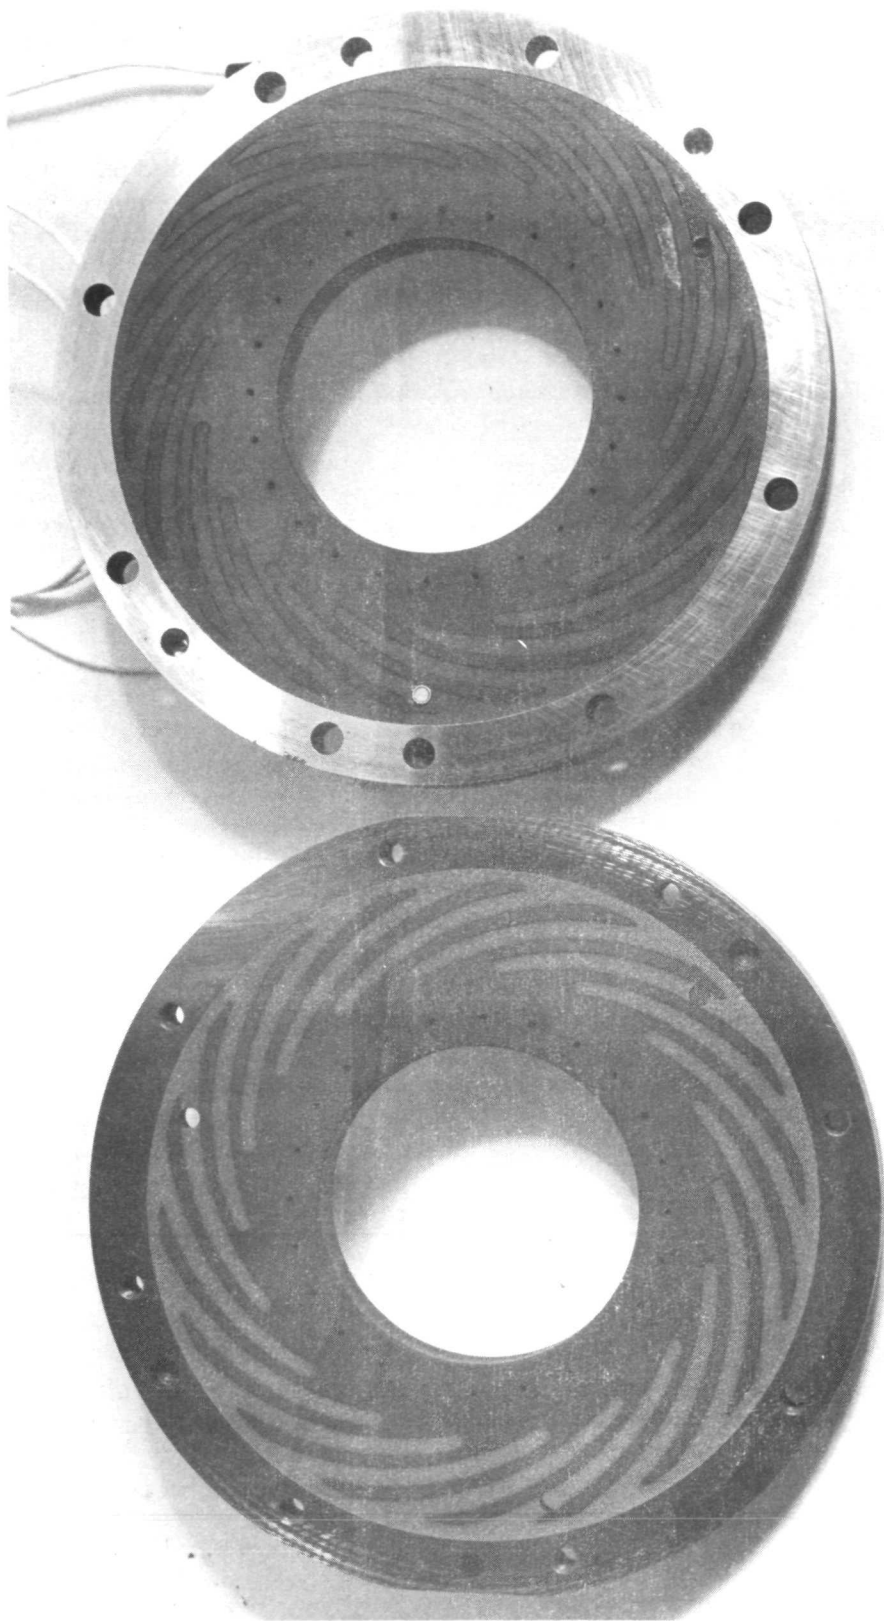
Test Thrust Stators Showing Spiral Grooves and
